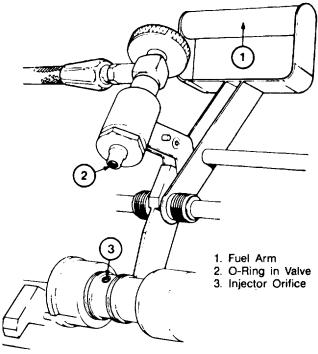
H-65. Fuel Arm and Supply Valve for Cylindrical Injectors
